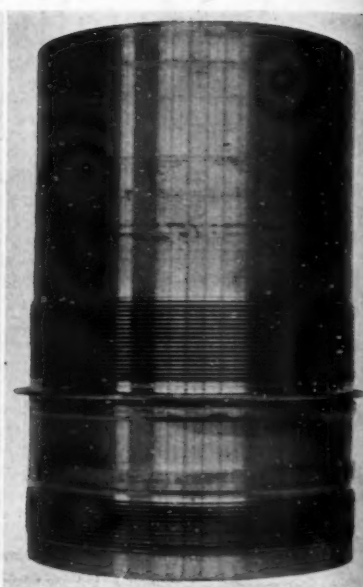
Liquid cooled cylinder liner from Mercedes Benz DB.605 A/1 engine.
